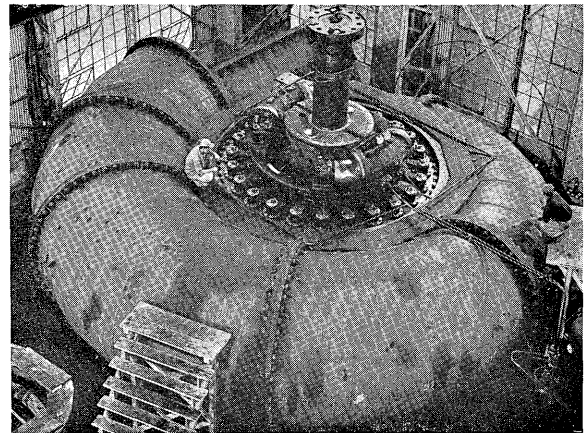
Plant assembly of 26,300 kW Francis turbine
